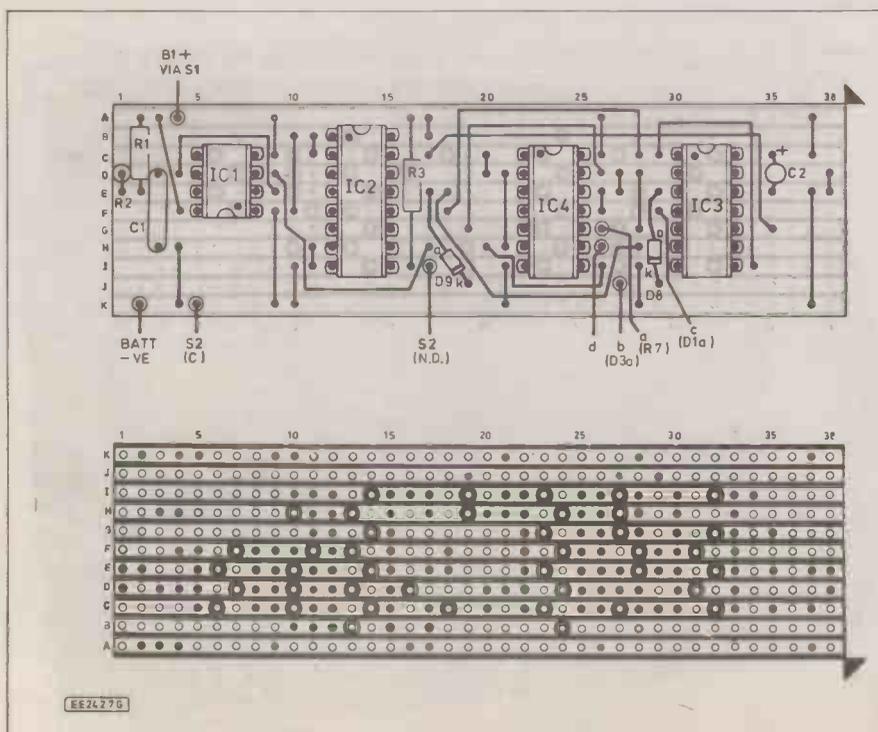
Display board component layout and details of breaks required in the underside copper strips.
